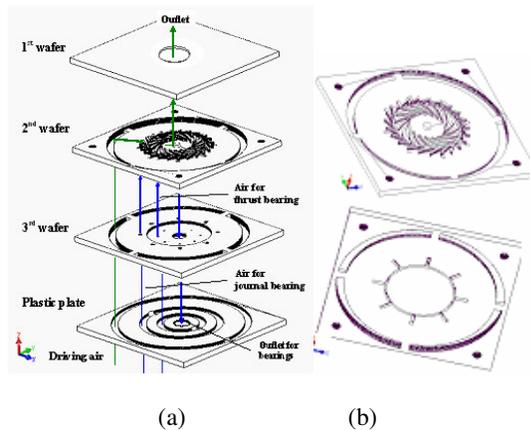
The exploded view. (a) Micro turbine device; (b) Top-side and backside view of the 2nd wafer.
